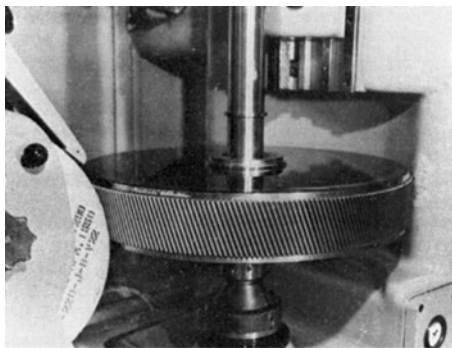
Threaded grinding wheel and helical gear. (Courtesy of Reishouer Corp., Elgin, Illinois, and Reishouer Ltd., Zurich, Switzerland.)
